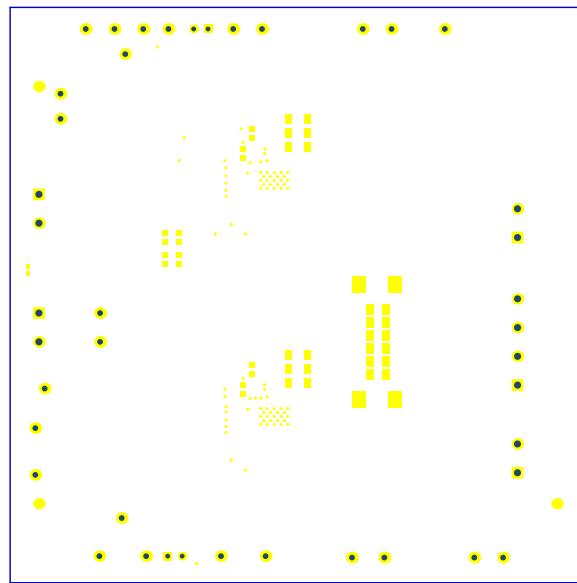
TPS543C20EVM-869 Bottom Solder Mask (Top View)
